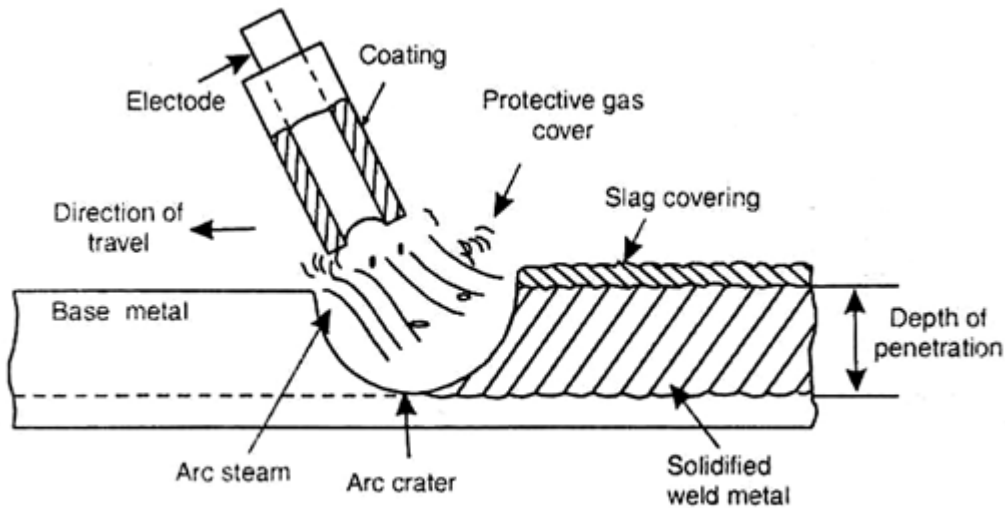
Cut away view of the arc welding with a coated electrode.
